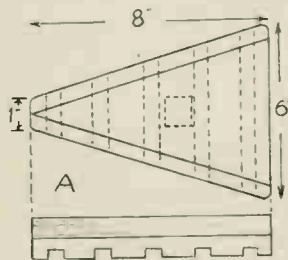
Shape and section of mop Fig. 2—The handle fixing Fig. 3—Adding the pad
